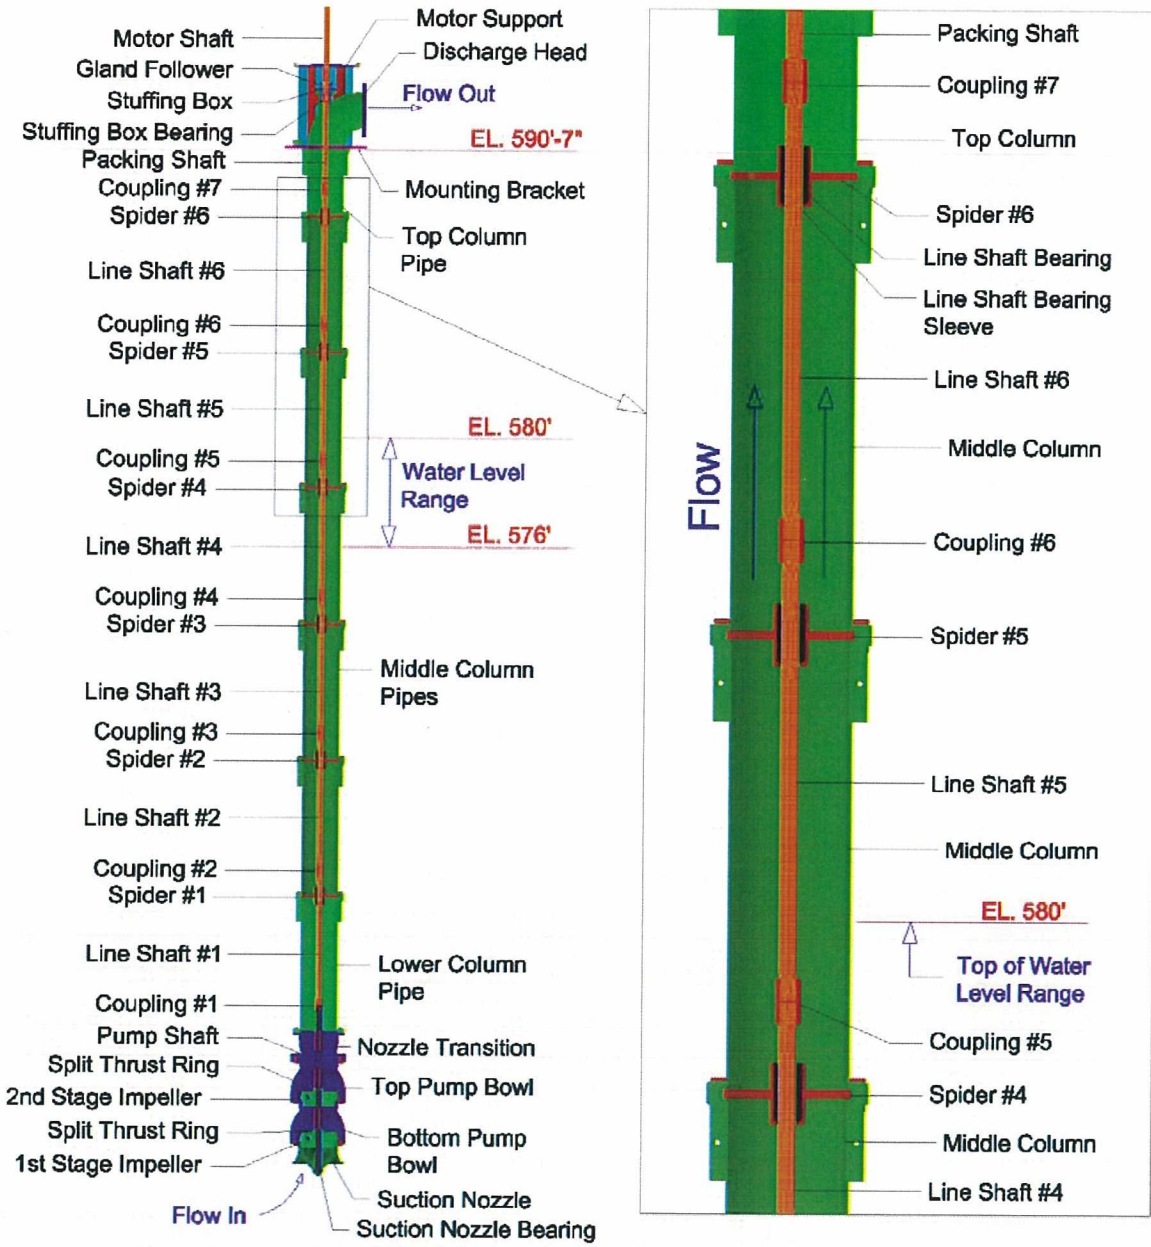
SWS Pumps Shaft Assembly [3b]
